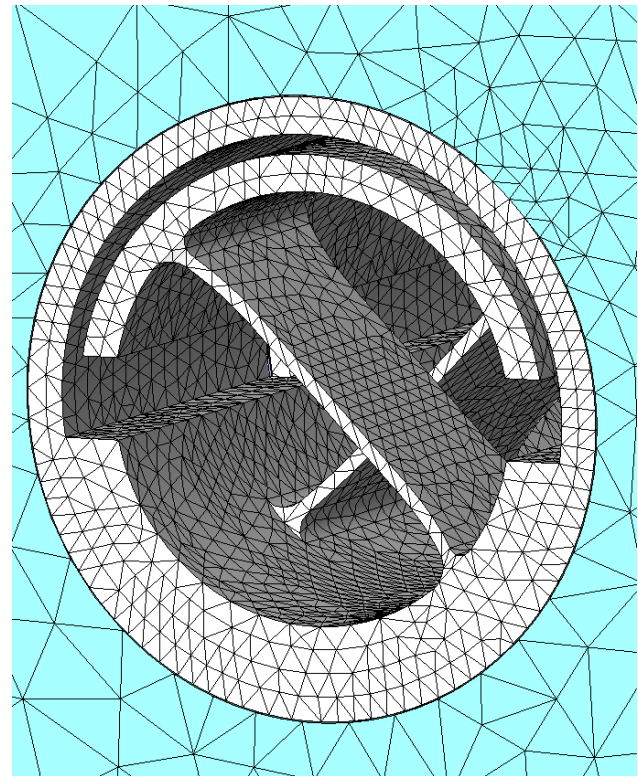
Optimized curvature based mesh with fillet features on the flexure sides removed. The fillets at the weld points of the flexure are retained.
